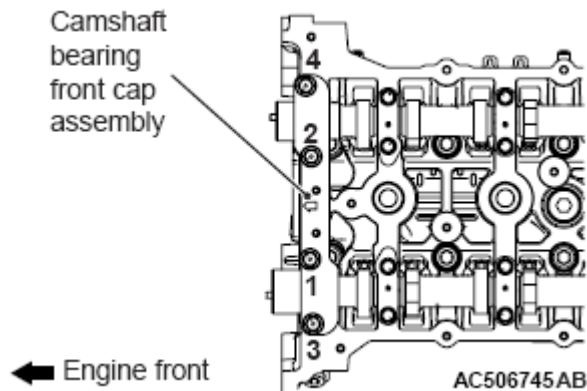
Identifying Loosening Sequence Of Camshaft Bearing Front Cap Mounting Bolts
